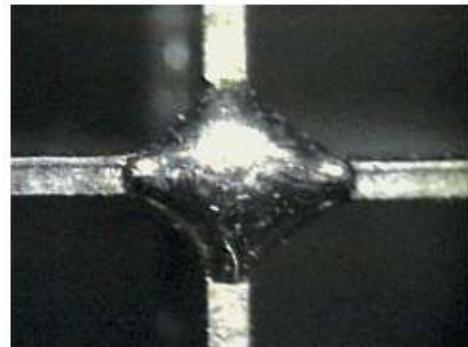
Photo of the Welding area of the space grid assembly. The width of the grid is 0.46mm, and the positioning error is less than 20um.
